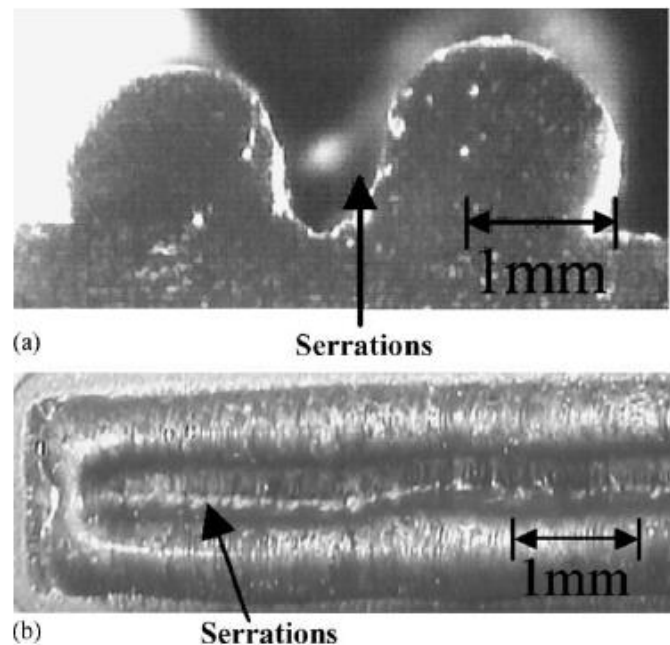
A picture showing serrations on a single track, rear fed diode laser cladding of 316L stainless steel with wire placement at the leading edge (a) sectioned view (b) top view [67]
